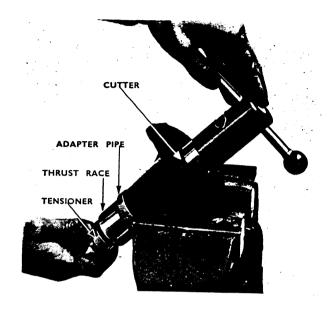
SERVICE TOOL NO. 6300 WITH ADAPTORS FT. 126
